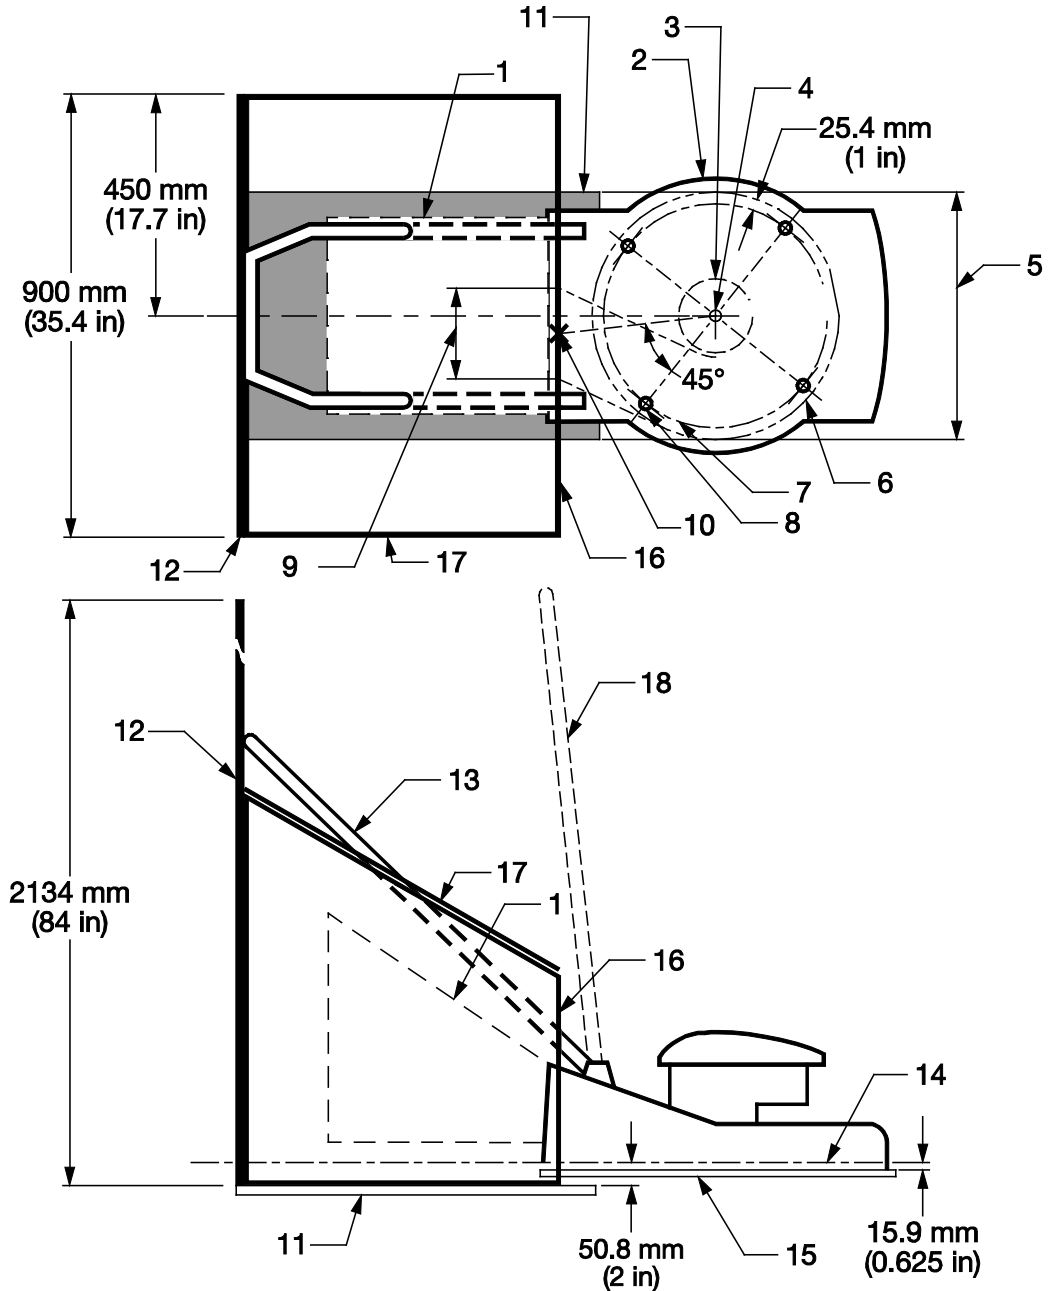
(e) – Plan view of a multi-blade rear discharge, fixture for structural integrity test
